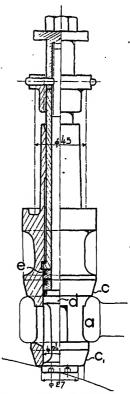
Starting Air Valve of Sulzer Marine Engine.
